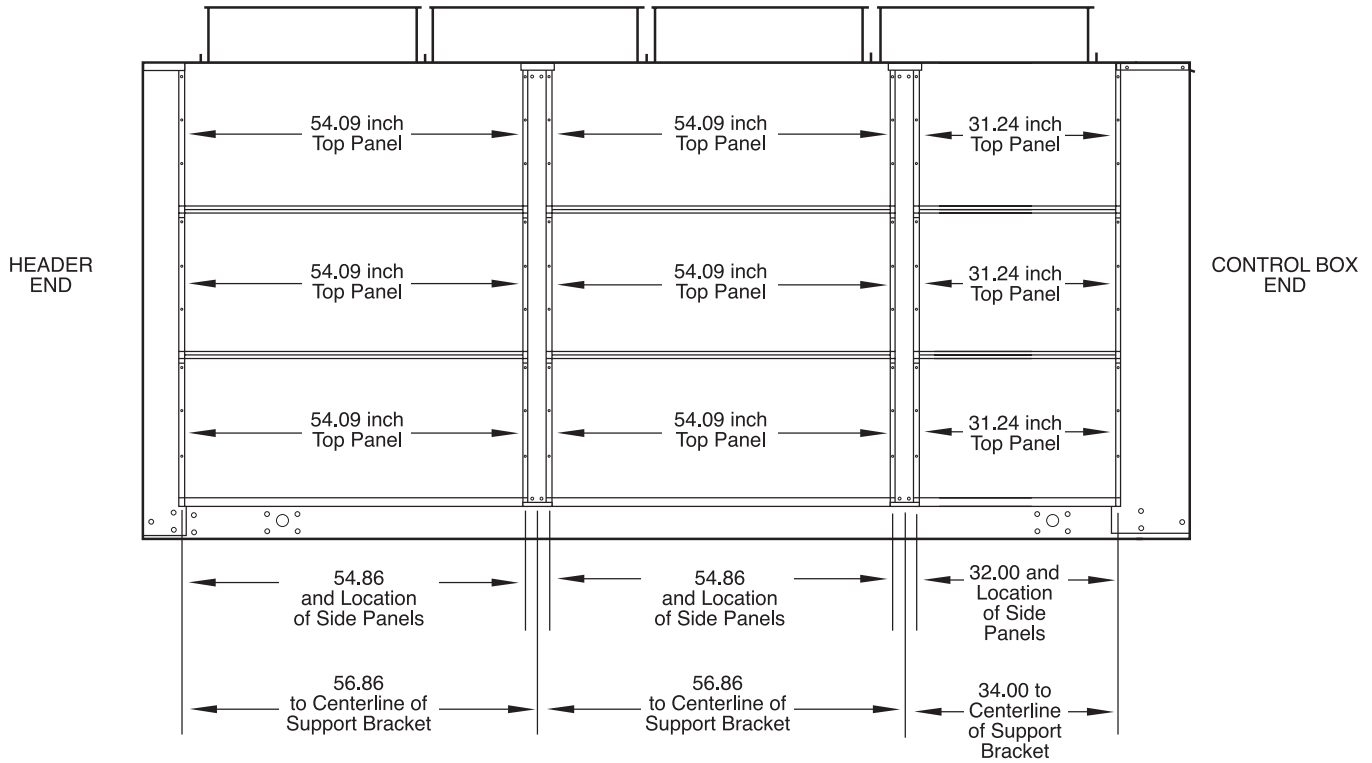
A — Unit Assembly, 30GXN,R080,090 — Both Sides
